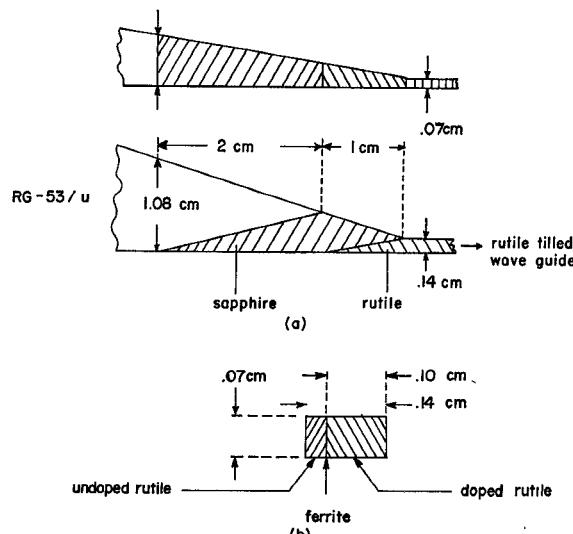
(a) Coupler dimensions. (b) Isolator cross section.
